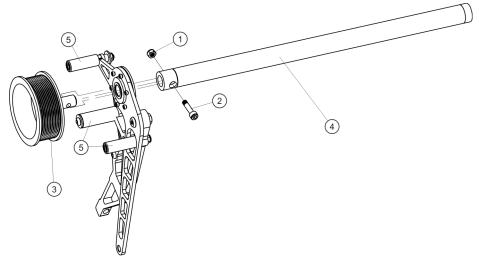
Pre-rotator clutch - small pulley, bearing and lower drive shaft
